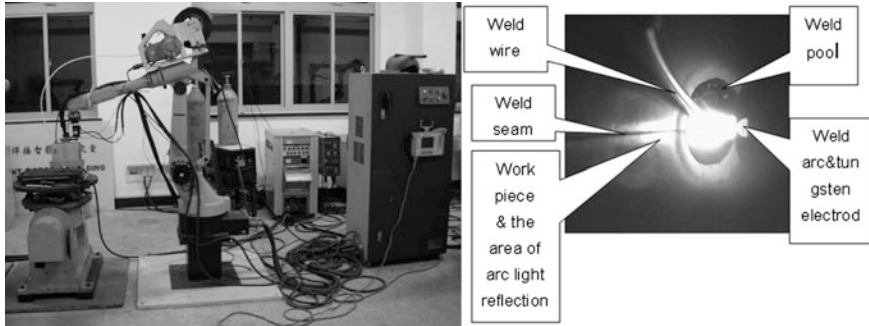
Robotic welding systems for 3D seam tracking during robotic GTAW process
